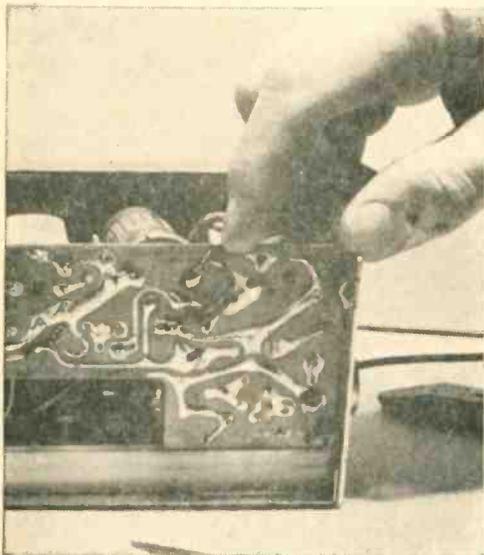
Finger points to short piece of wire used to bridge broken spot in printed circuit wiring.
